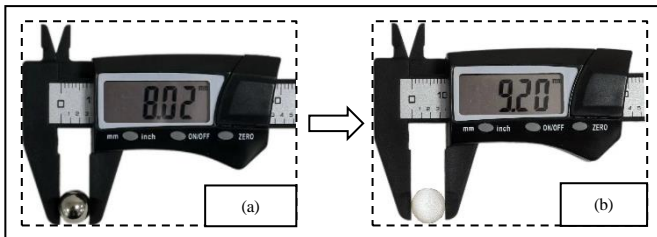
The raw magnetic ball (a) and the fabricated polishing tool (b)
